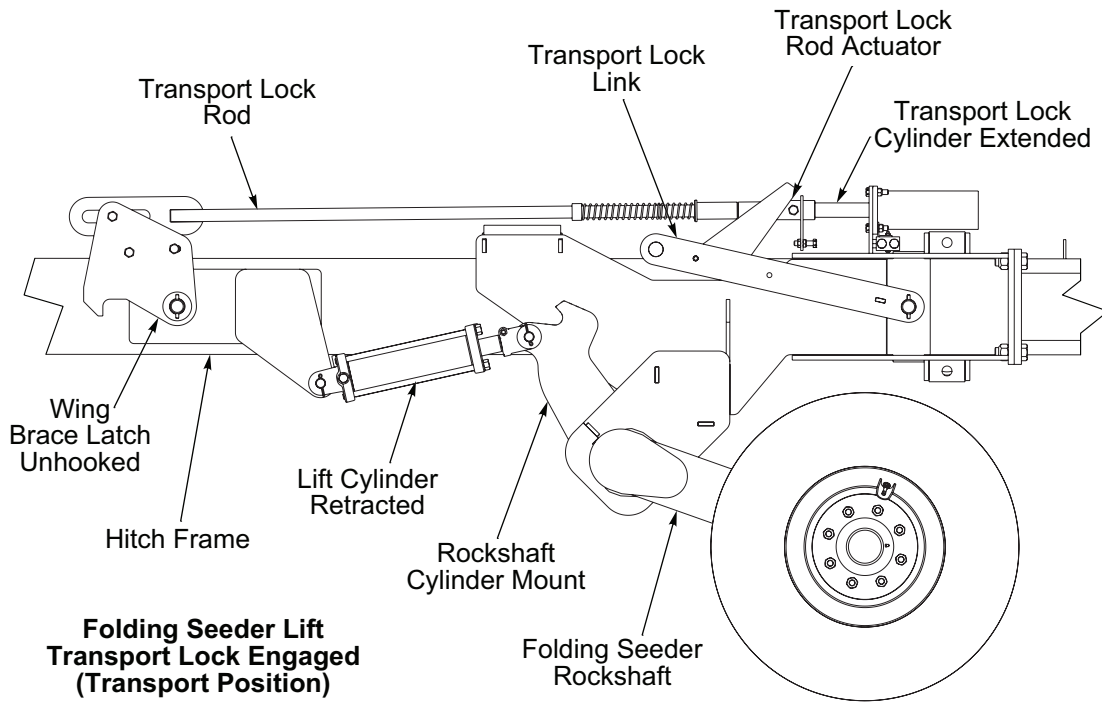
Folding Seeder Rockshaft Hydraulic Transport Lock
